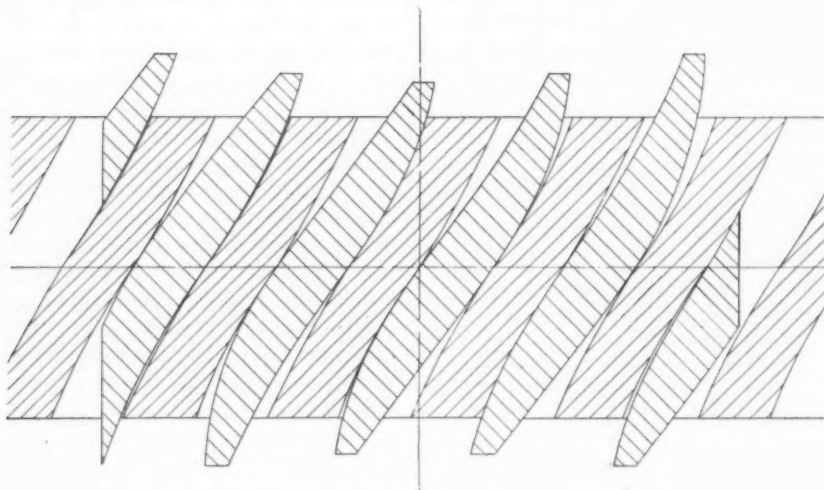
Eight-tooth Hindley worm—40-tooth gear.
